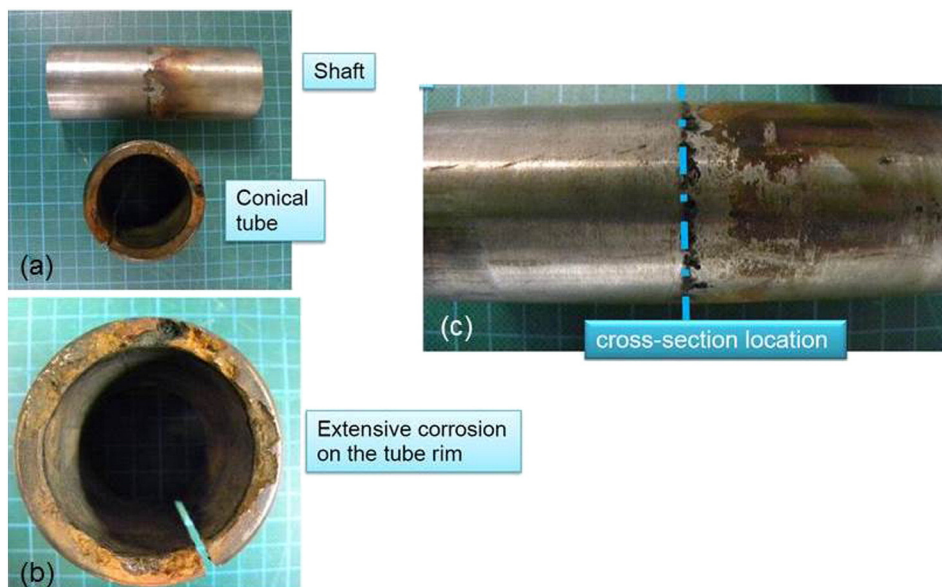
Macrographs showing the corroded coupling and shaft parts of the pump.
